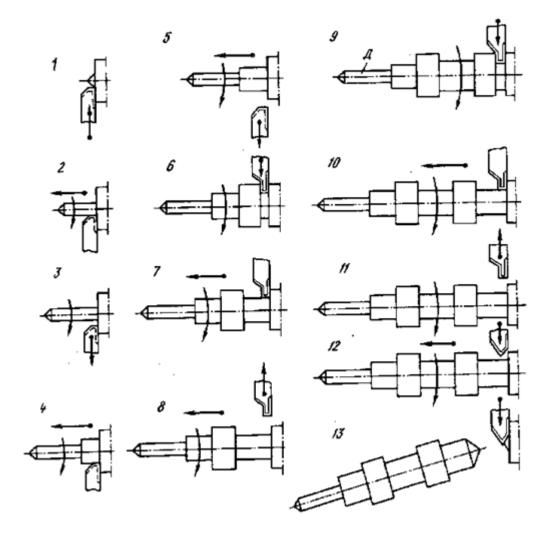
Scheme of machining roller on a machine of longitudinal sharpening
